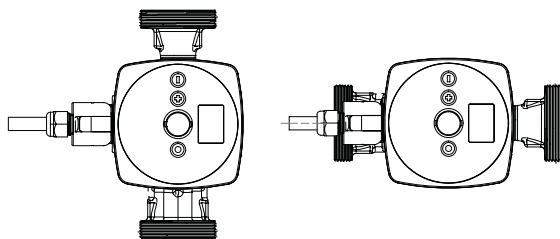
Use of the straight plug housing with the electronic system housing (control panel) turned by 90 degrees
